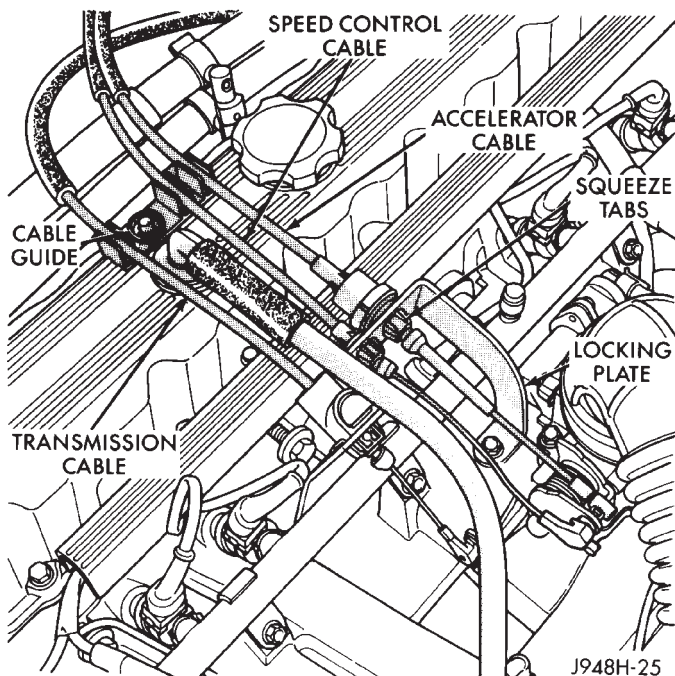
Cable Guide/Locking Plate—4.0L Engine
